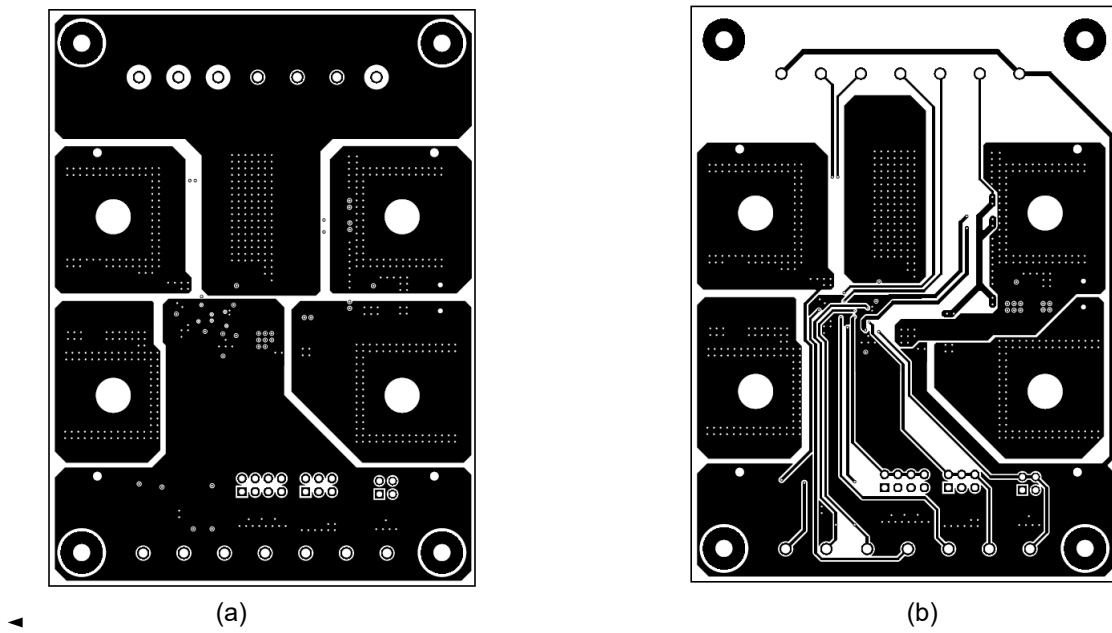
TPS48110Q1EVM Board (a) Inner Signal Layer (b) Inner Routing Layer
